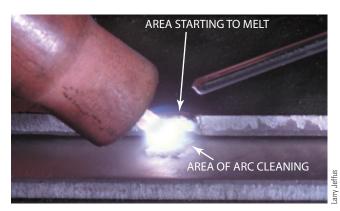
Be sure both the top and bottom pieces are melted before adding filler metal.
